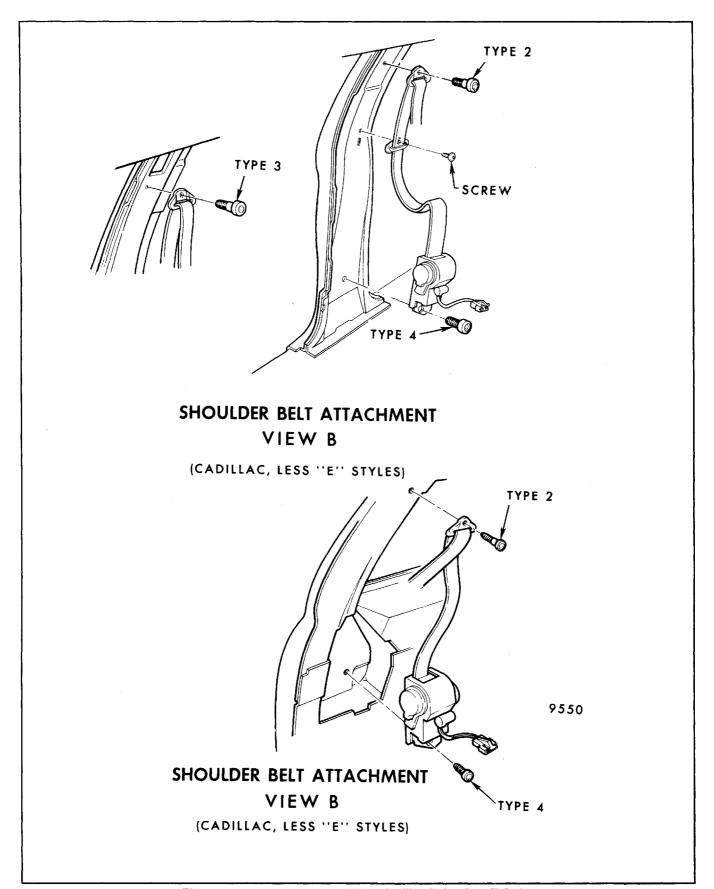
Front Seat Shoulder Belts - Cadillac Styles, Less E Styles
